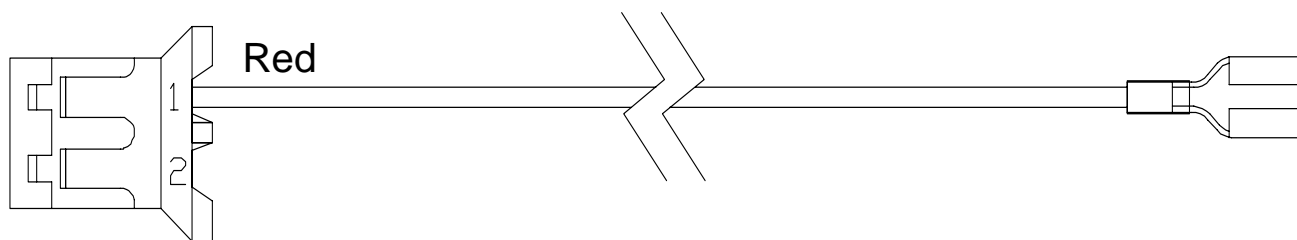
24V Relay to Interconnect Cable Assembly
